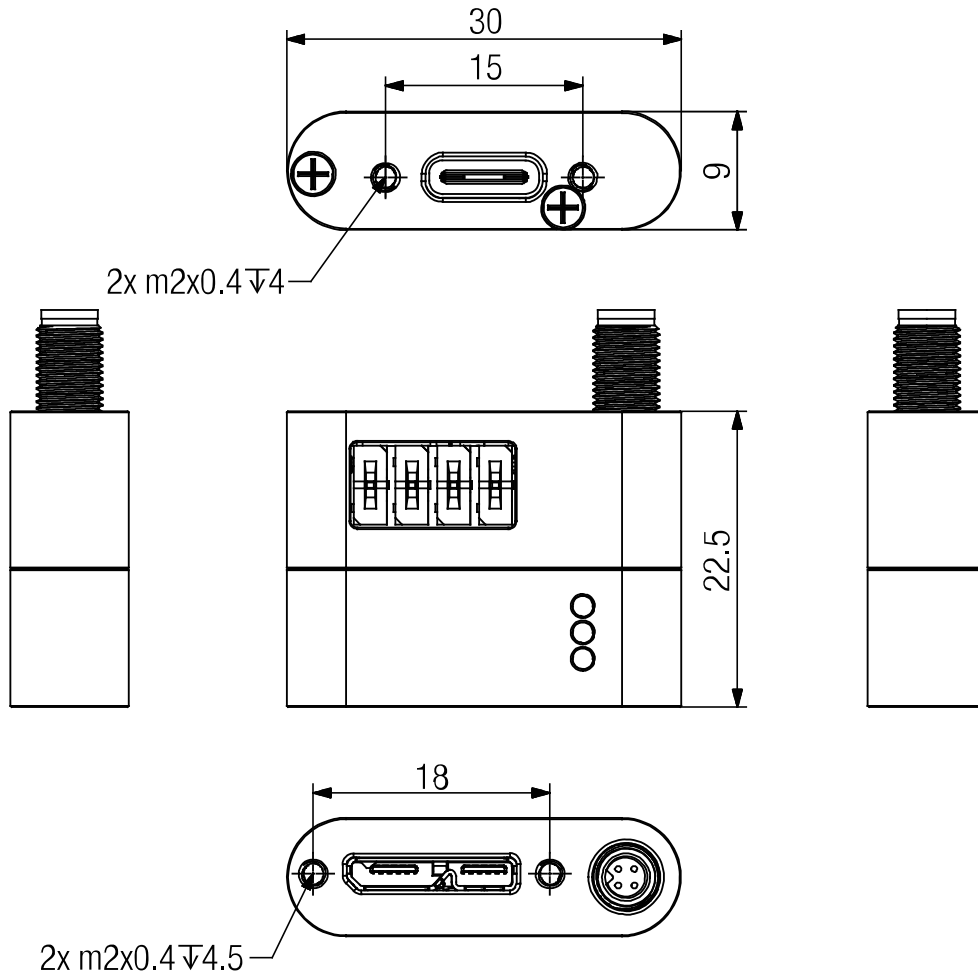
dimensions of power injector ADPT-PWR-INJ-TC
